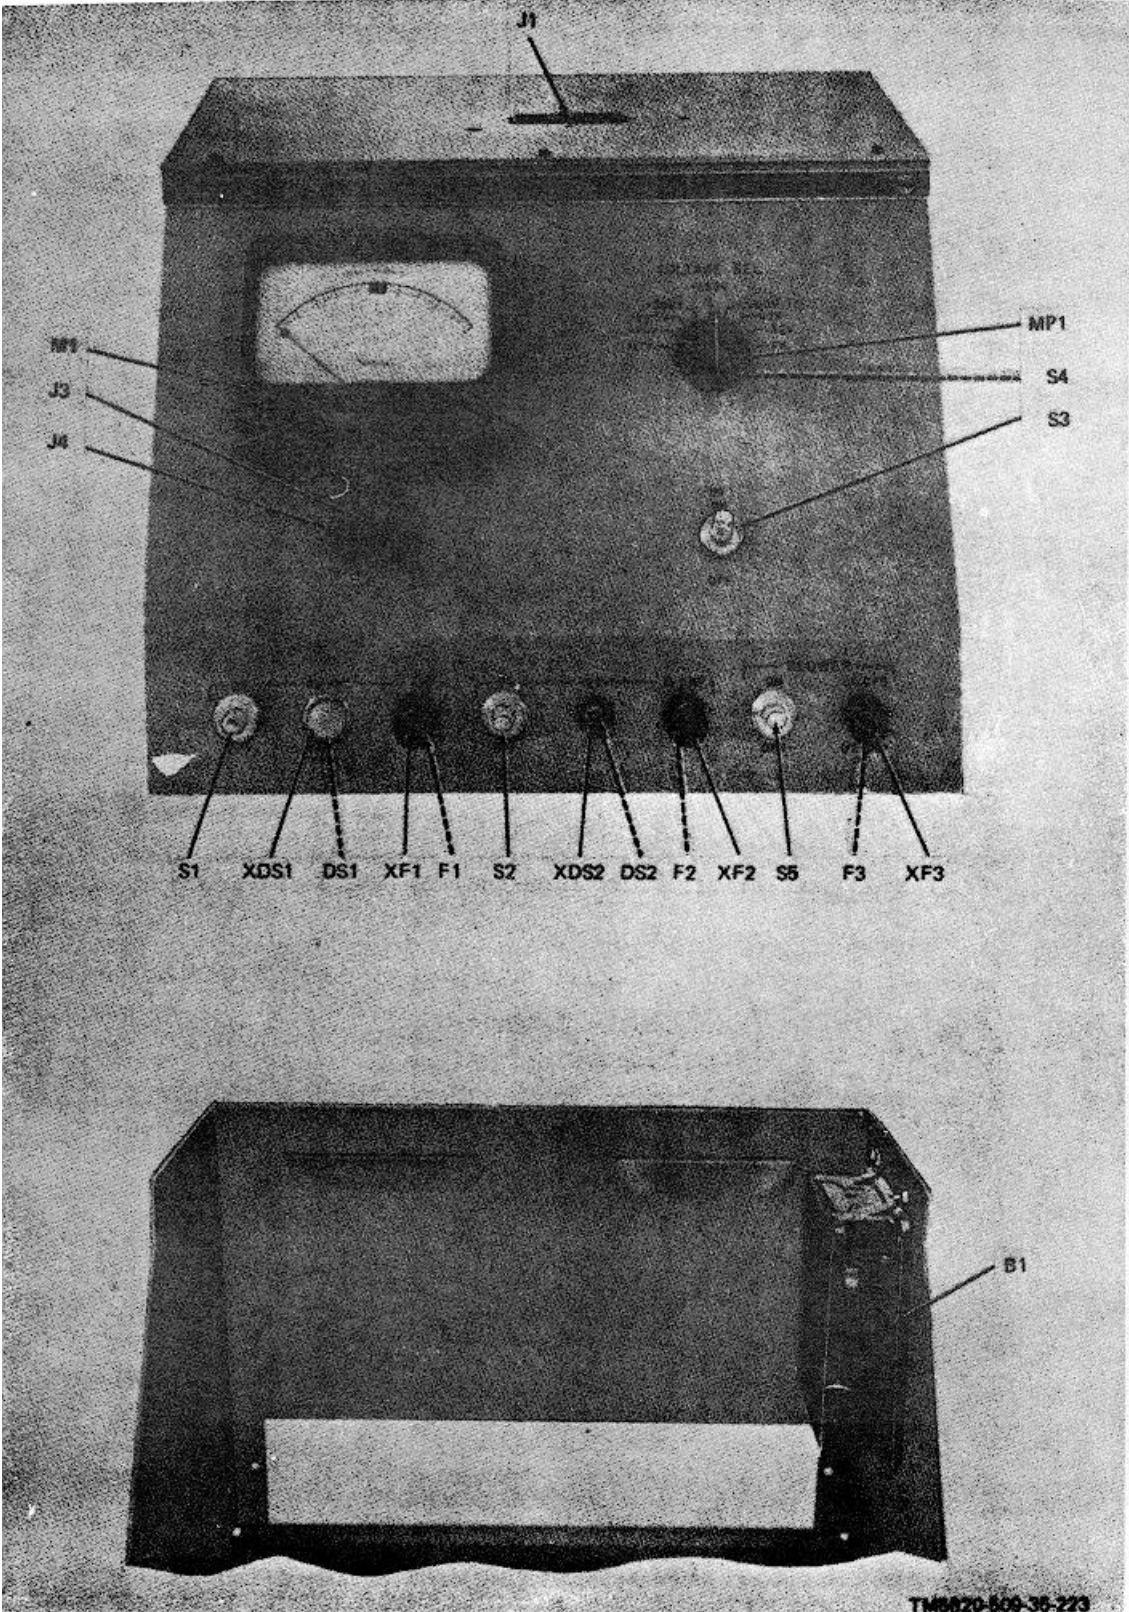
Test Fixture for Power Supply PP-3518/PrC-47, Parts Location.
